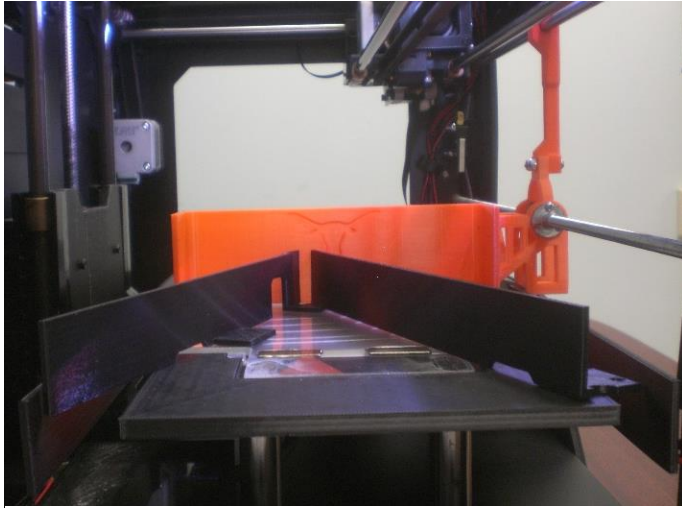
Sweeper guide ramps being swept off the build plate. The mounted sweeper guide ramps keep long parts from jamming as they exit the printer.
